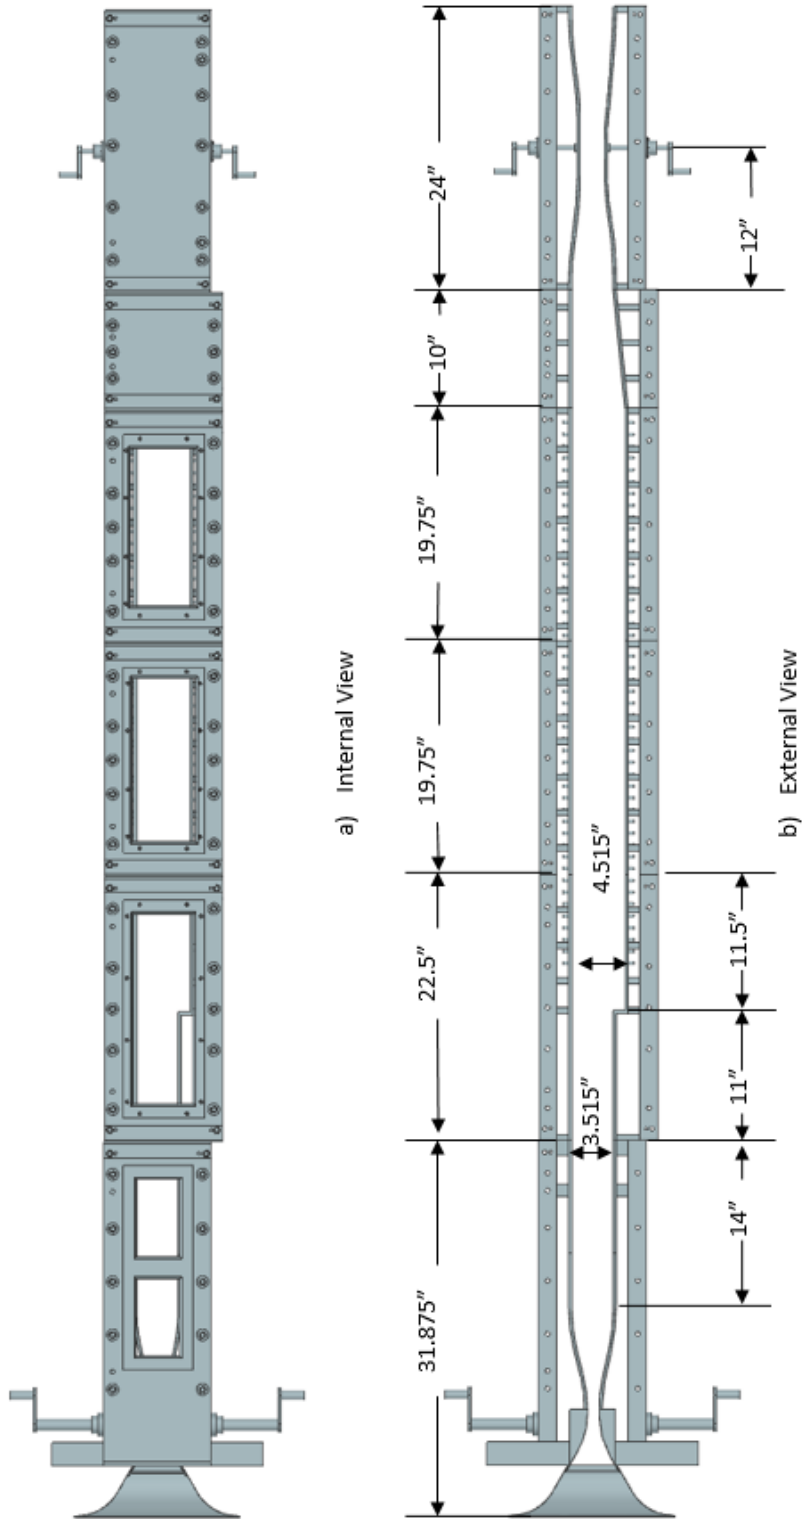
Original Proposed Supersonic Wind Tunnel Test Section
